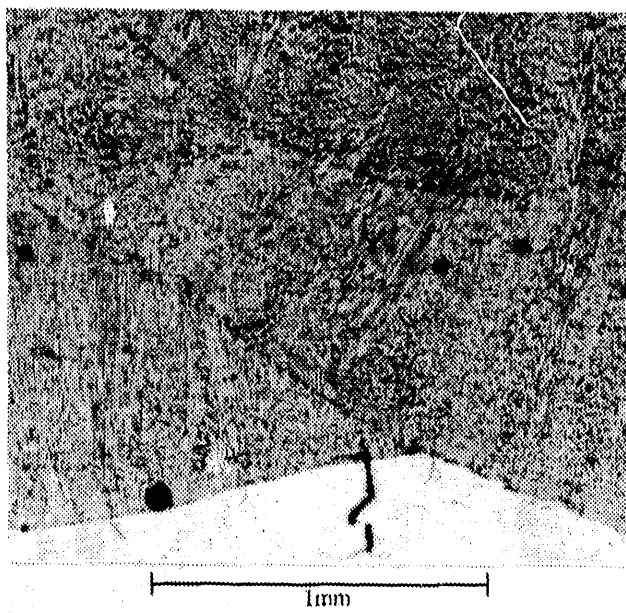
Preferential location of underbead cracks between weld weave passes of overlays
